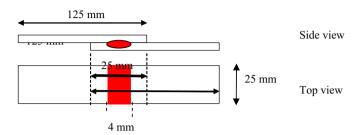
Lap shear specimen configuration. The welded area in each specimen was 25 x 4 mm<sup>2</sup>
